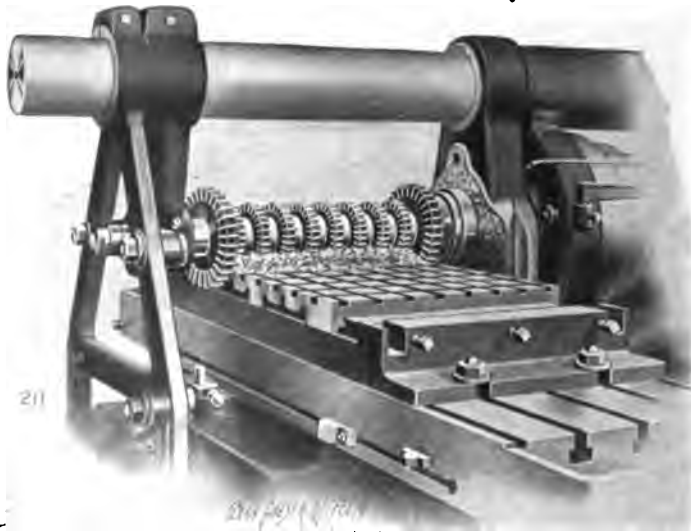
Typical job of gang milling where high-speed steel tools pay. The finish on this job (cutters 4" and 8" diameter, 66 r.p.m., table traverse about 17" per minute) is within the accuracy limit of 0.001", and no hand finishing is necessary in fitting pieces together. Courtesy Cincinnati Milling Machine Company.
